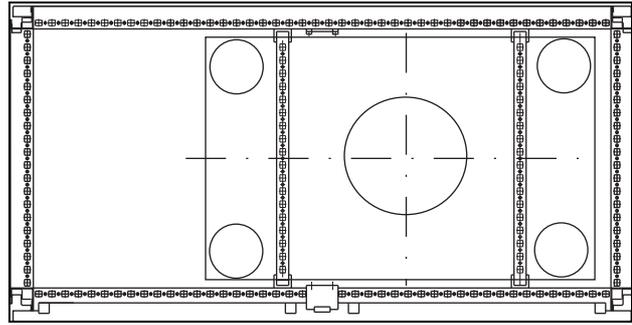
Roof plate reinforcement for the TS 8 enclosure
